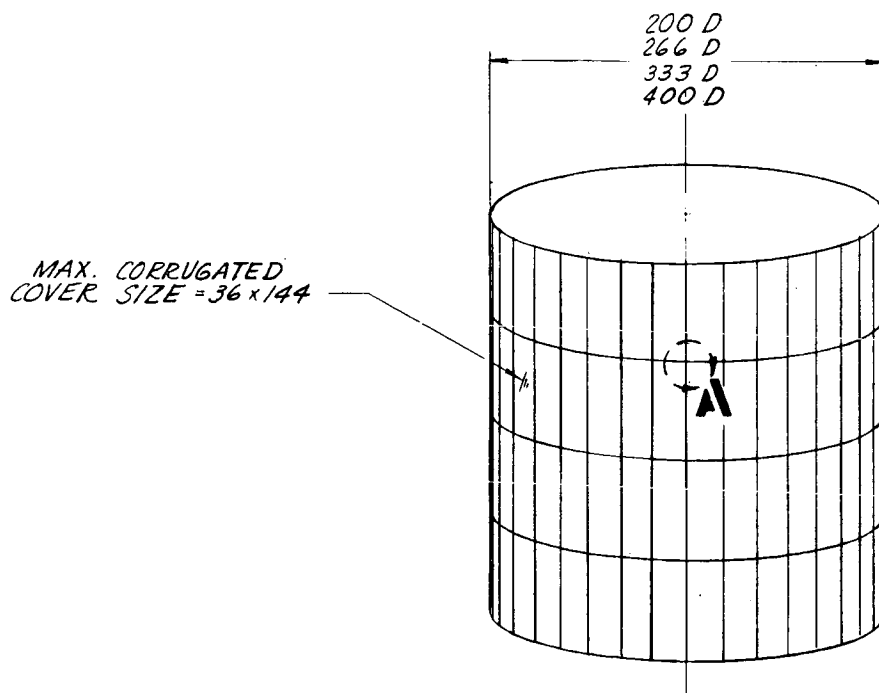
Design Drawing - Double-wall Trapezoidal Corrugation
